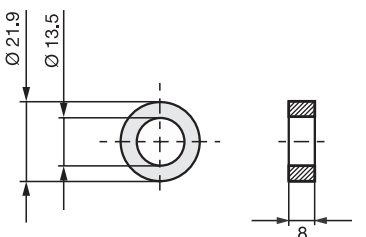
Installation dimensions of BTL-P-1014-2R position magnet
